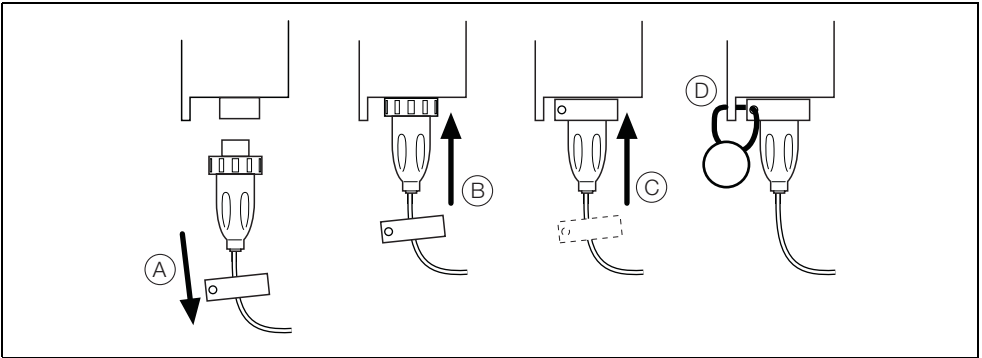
AquaMaster Explorer – Use of Tamper-Detection Seals
